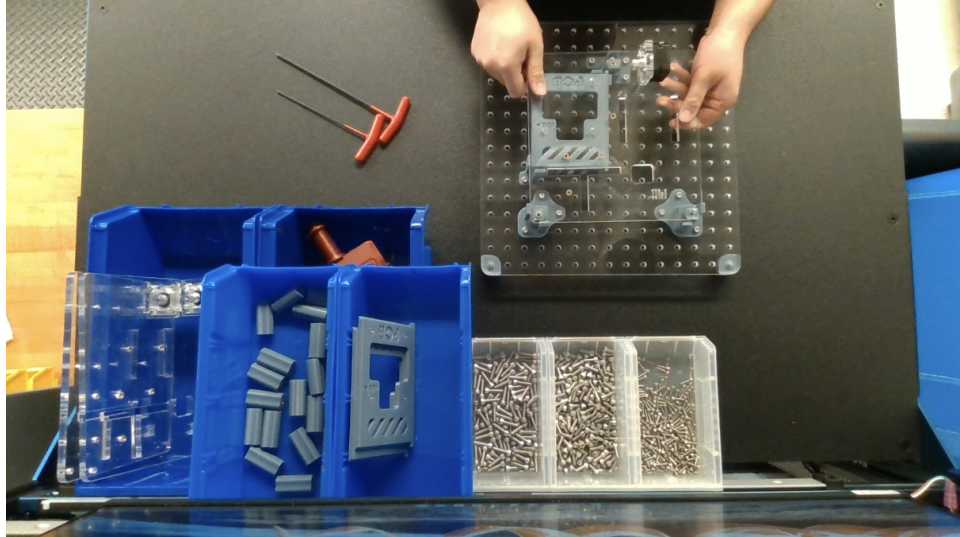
Assembly operator placing the base acrylic plate in the fixture
